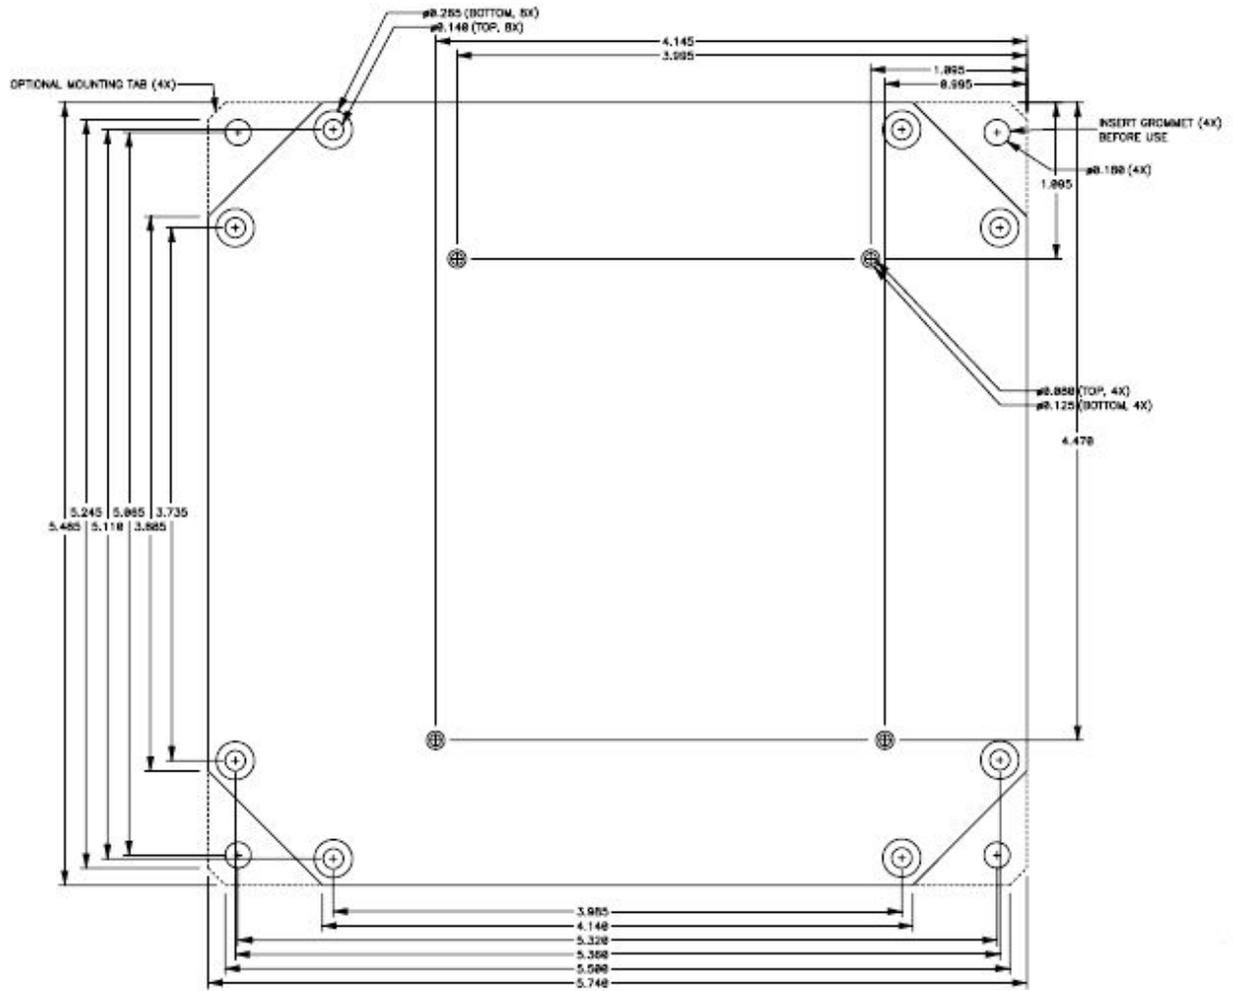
Bottom (Blank) End Cap Dimensions (DSC# PBEC-12-K)
